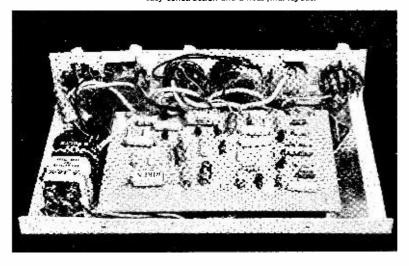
The component layout. Using the recommended P.C. board makes for easy construction and a neat final layout.
